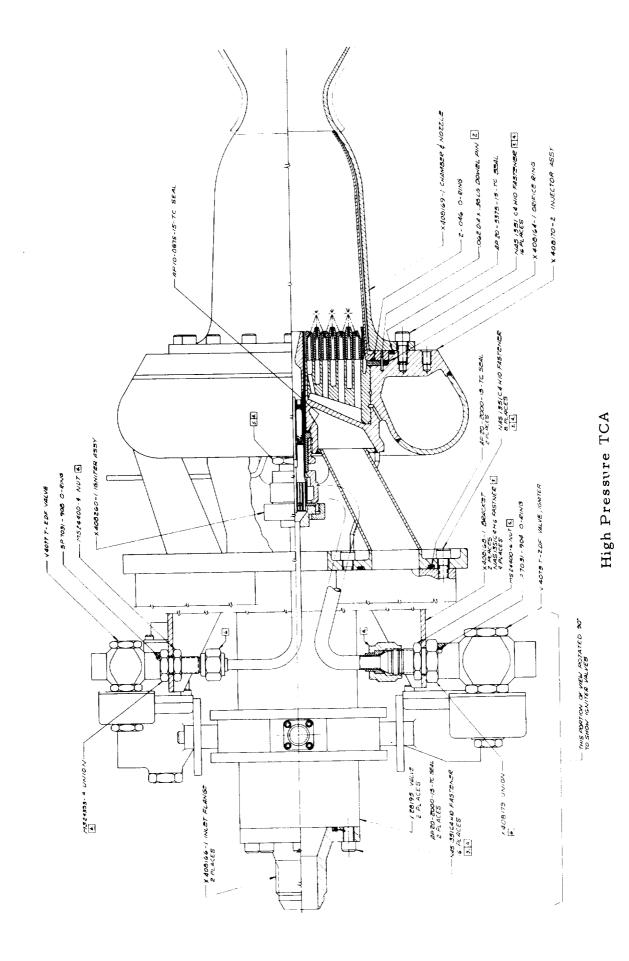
Duct Cooled Thruster Assembly Cross-Section
